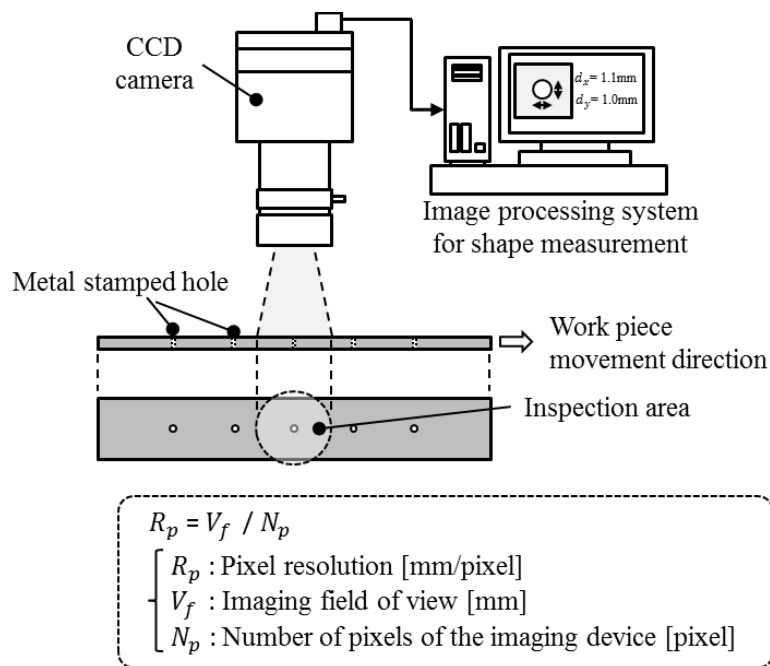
Image processing and inspection system. By enlarging the surface of the inspection object with a lens and imaging with the CCD camera, shape information of the surface of the object is acquired at high speed.
